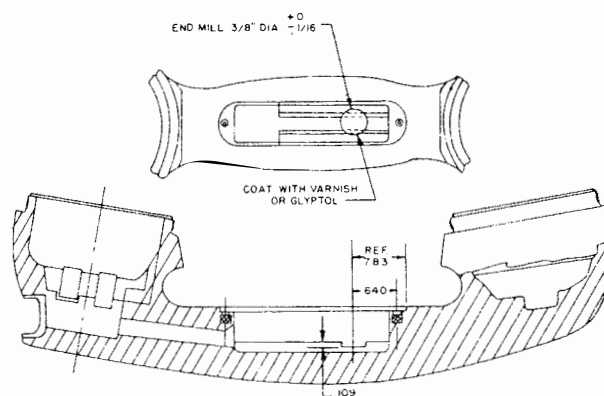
Handsets H-169/U and NT-51007A, Modification Dimensions
